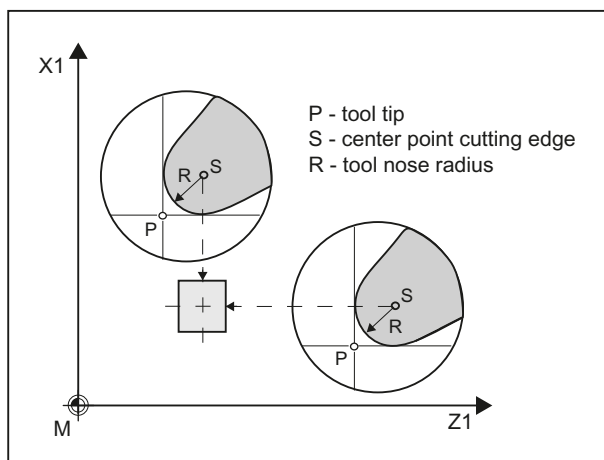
Measuring the length of a turning tool: Offset by the cutting edge radius, example SL=3
